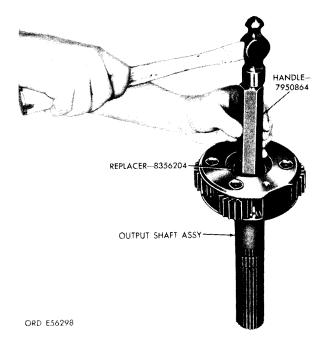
Installing bushing into transmission output shaft using handle 5120-316-9182 (7950864) and replacer 5120-759-5415 (8356204).
